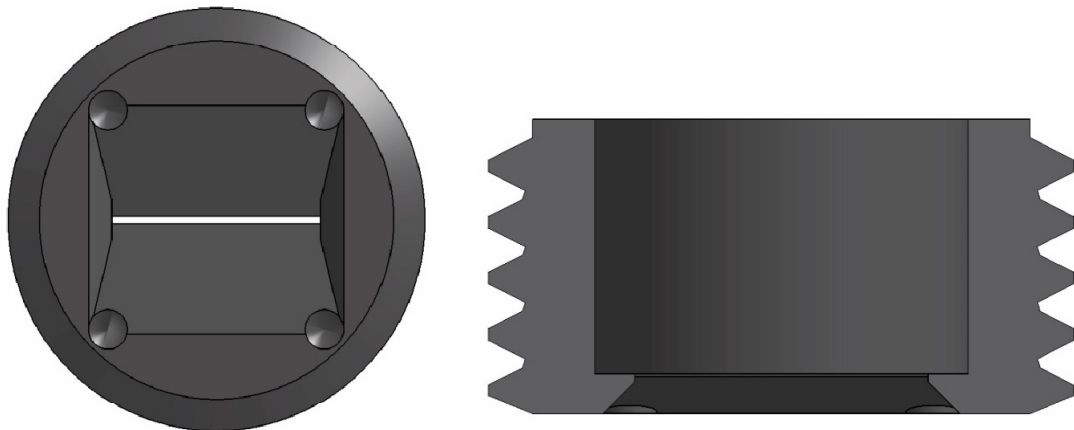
Bottom (left) and section (right) view of the rectangle orifice die.
